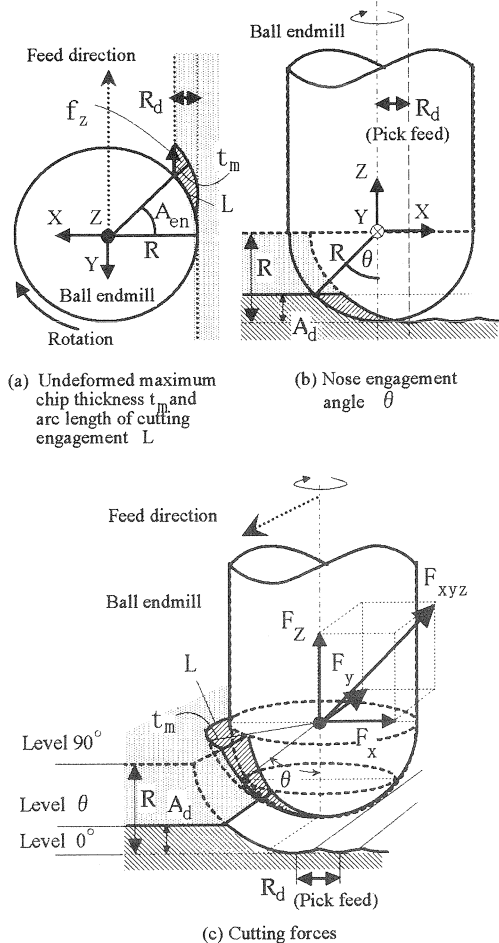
Geometrical model for pick feed cutting by ball end mill
